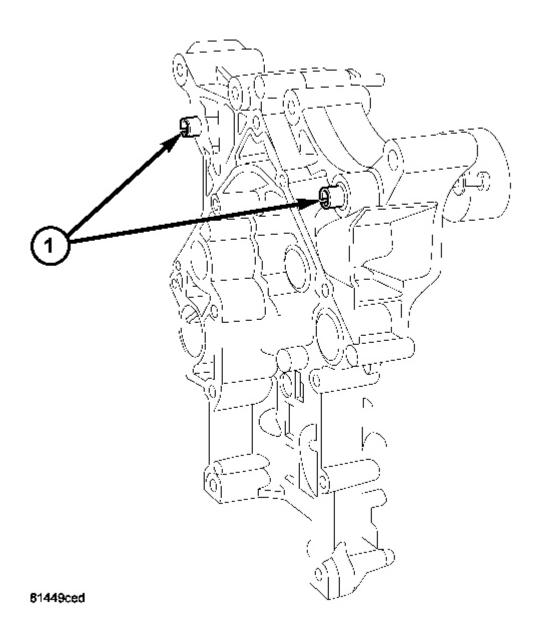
Front Cover Slide Bushings Courtesy of CHRYSLER LLC
